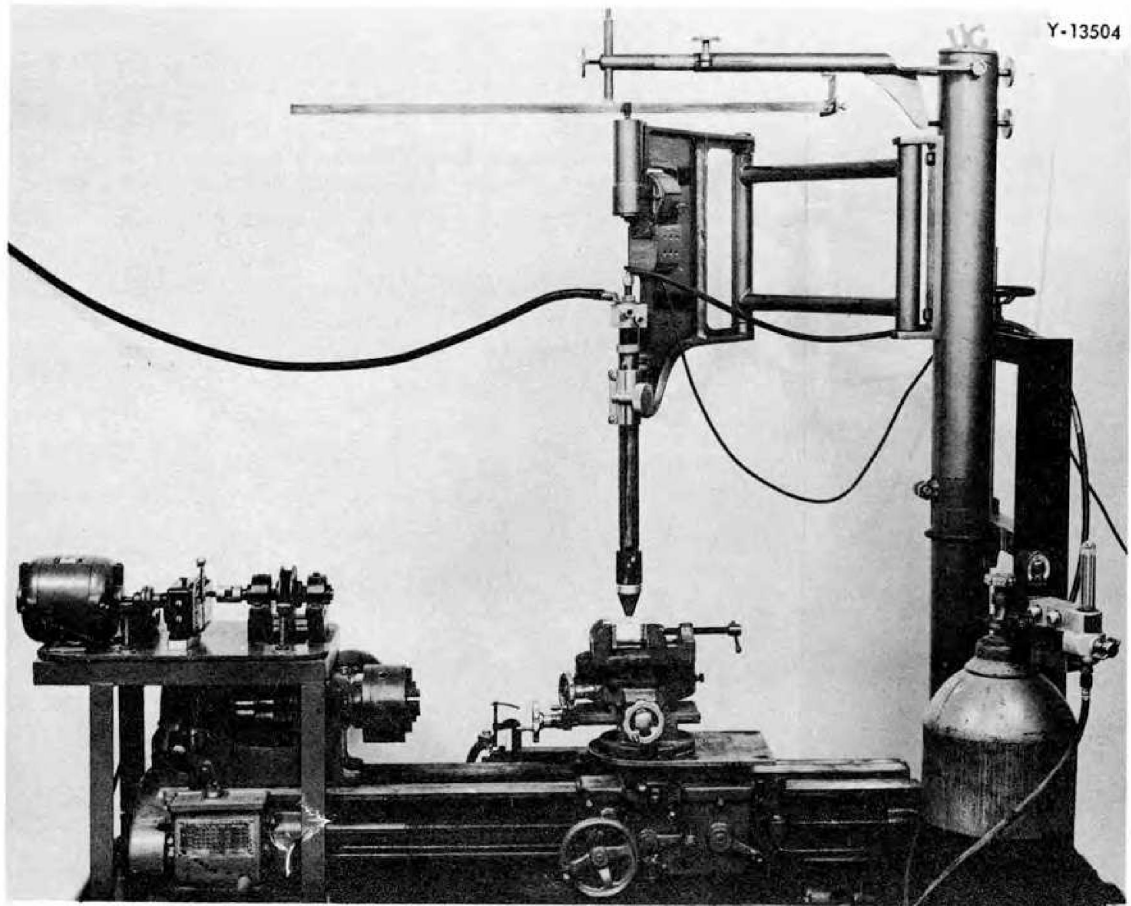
Semiautomatic Tube-to-Header Welding Equipment.
